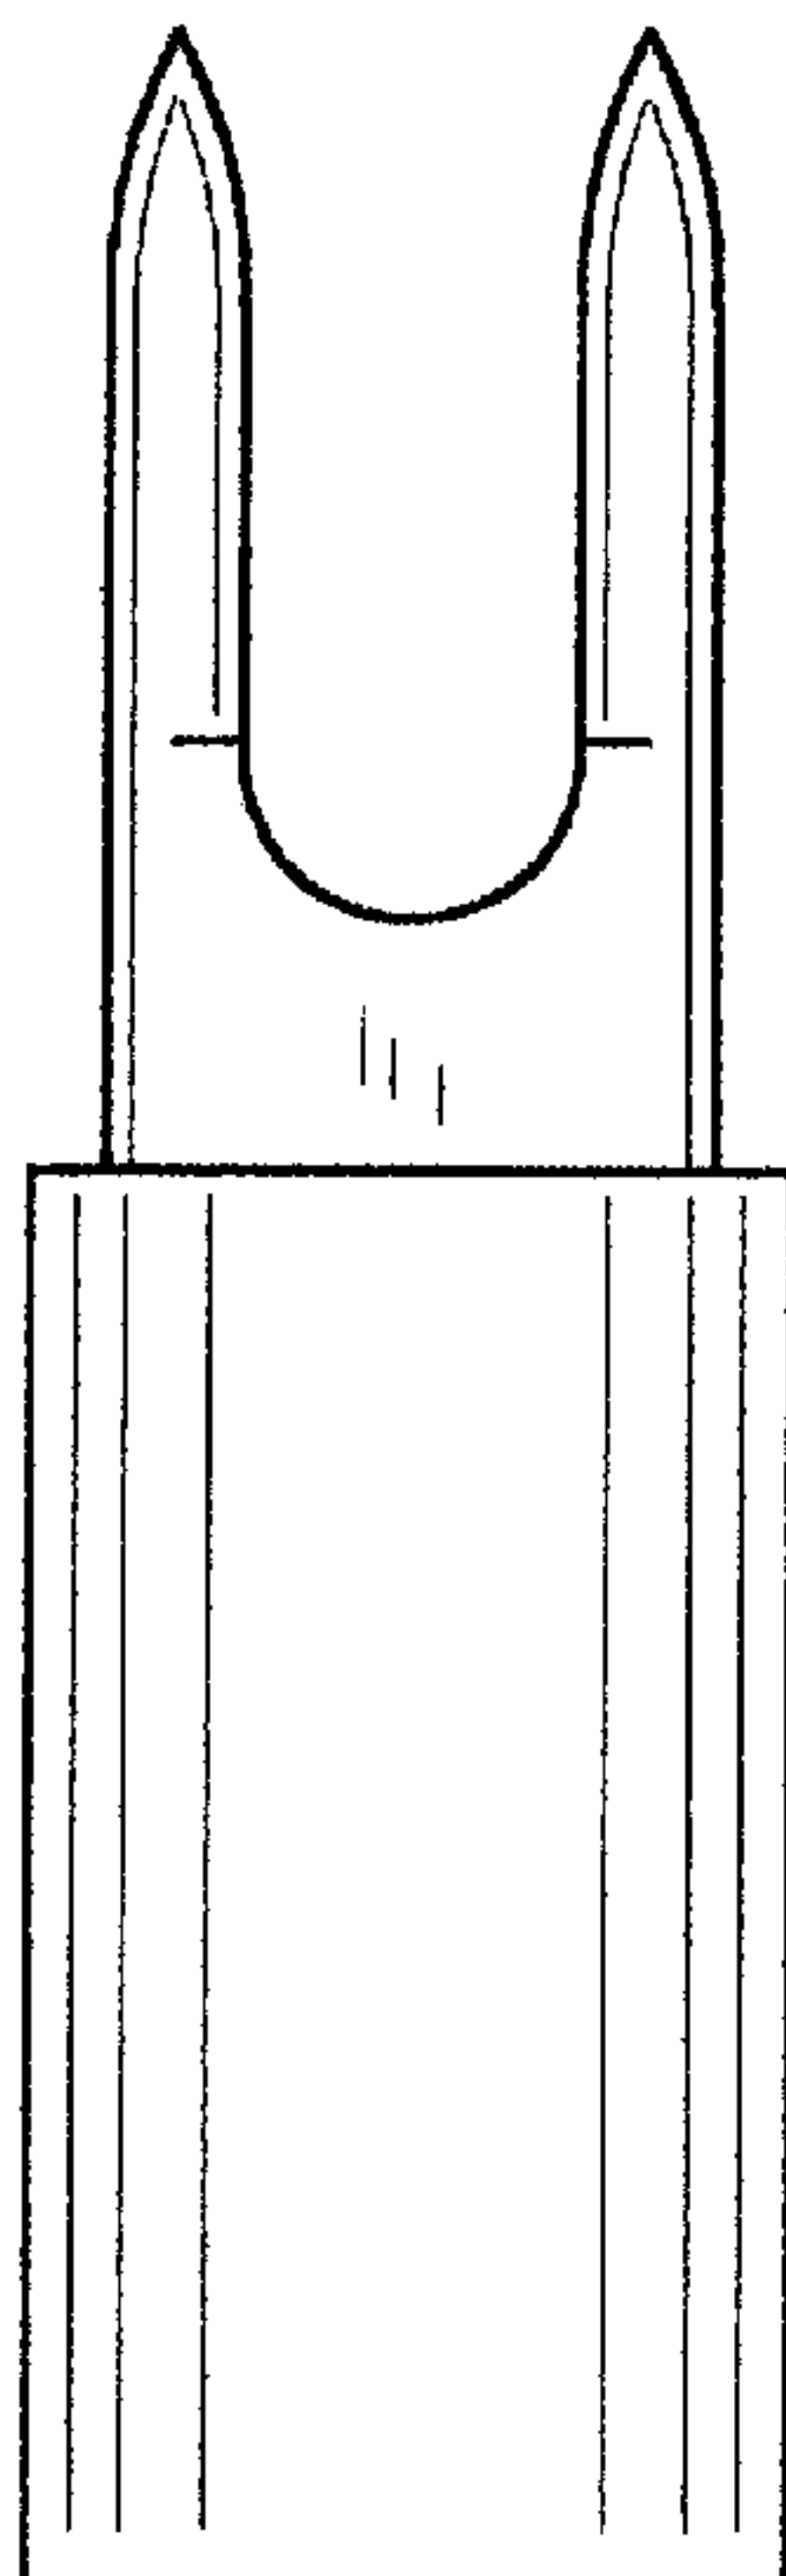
is a front elevated view of a putter mountable divot replacement tool showing my new design.
